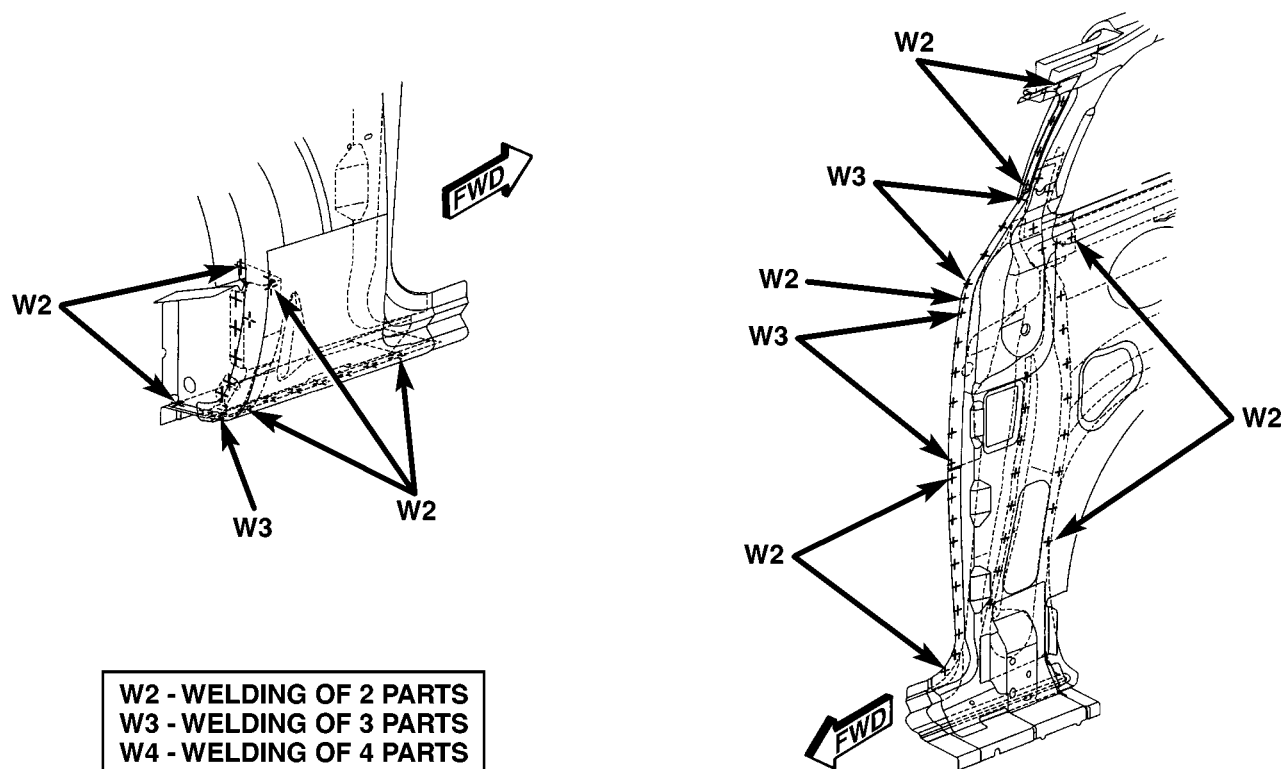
RIGHT REAR INNER QUARTER PANEL/OUTER WHEELHOUSE - LONG WHEEL BASE ONLY
